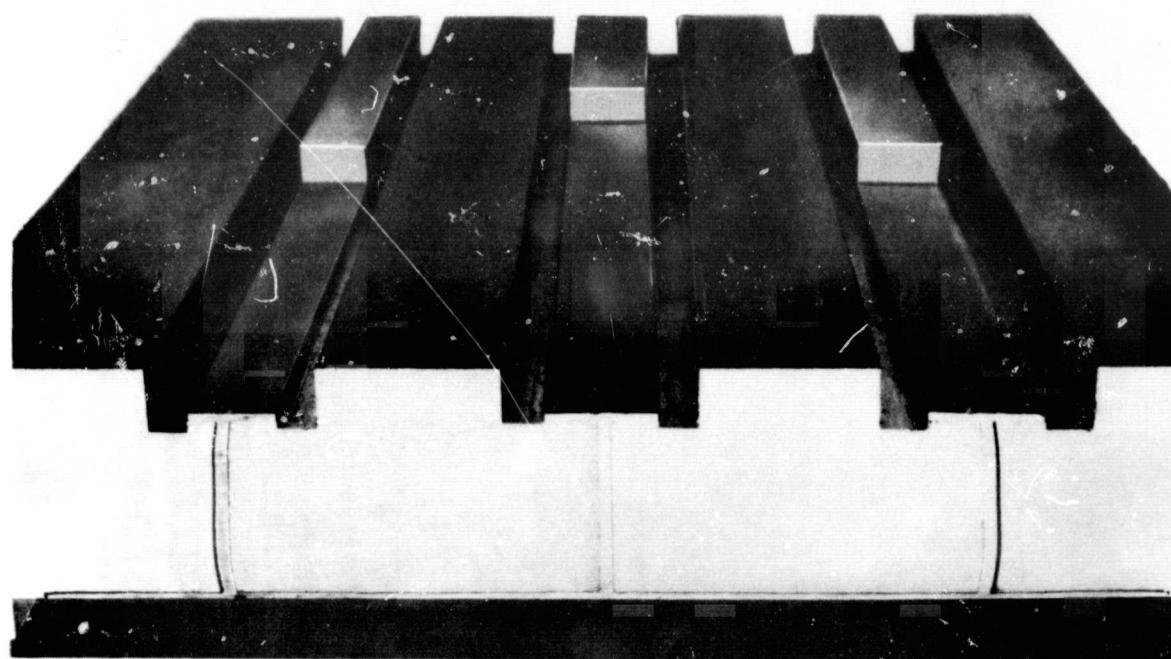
PACK A END VIEW SHOWING TITANIUM PART
